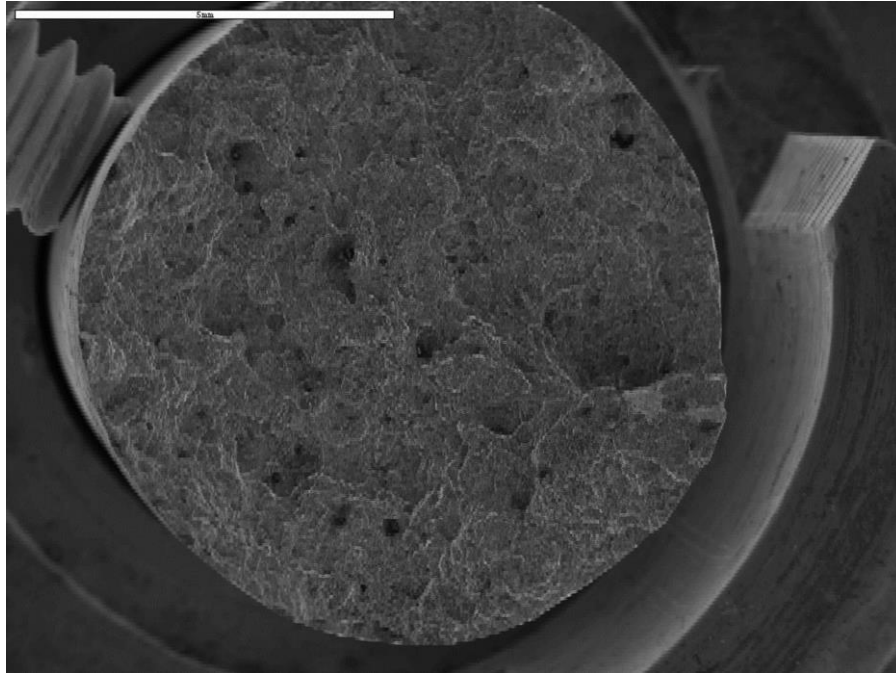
Overall view of the fracture surface of A356 alloy tensile specimen.
